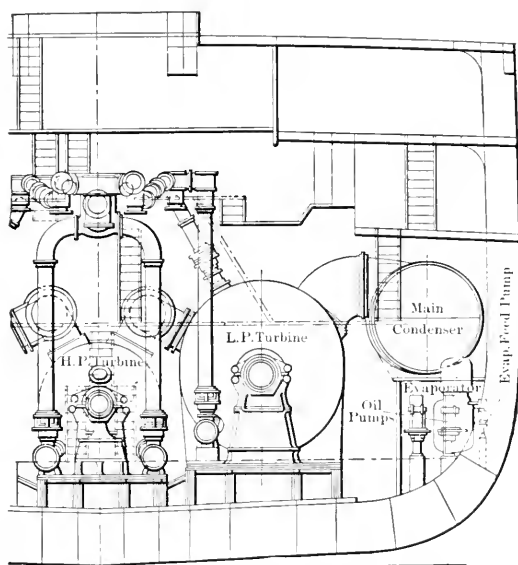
Cross-section through machinery space, steamship Carmania.
